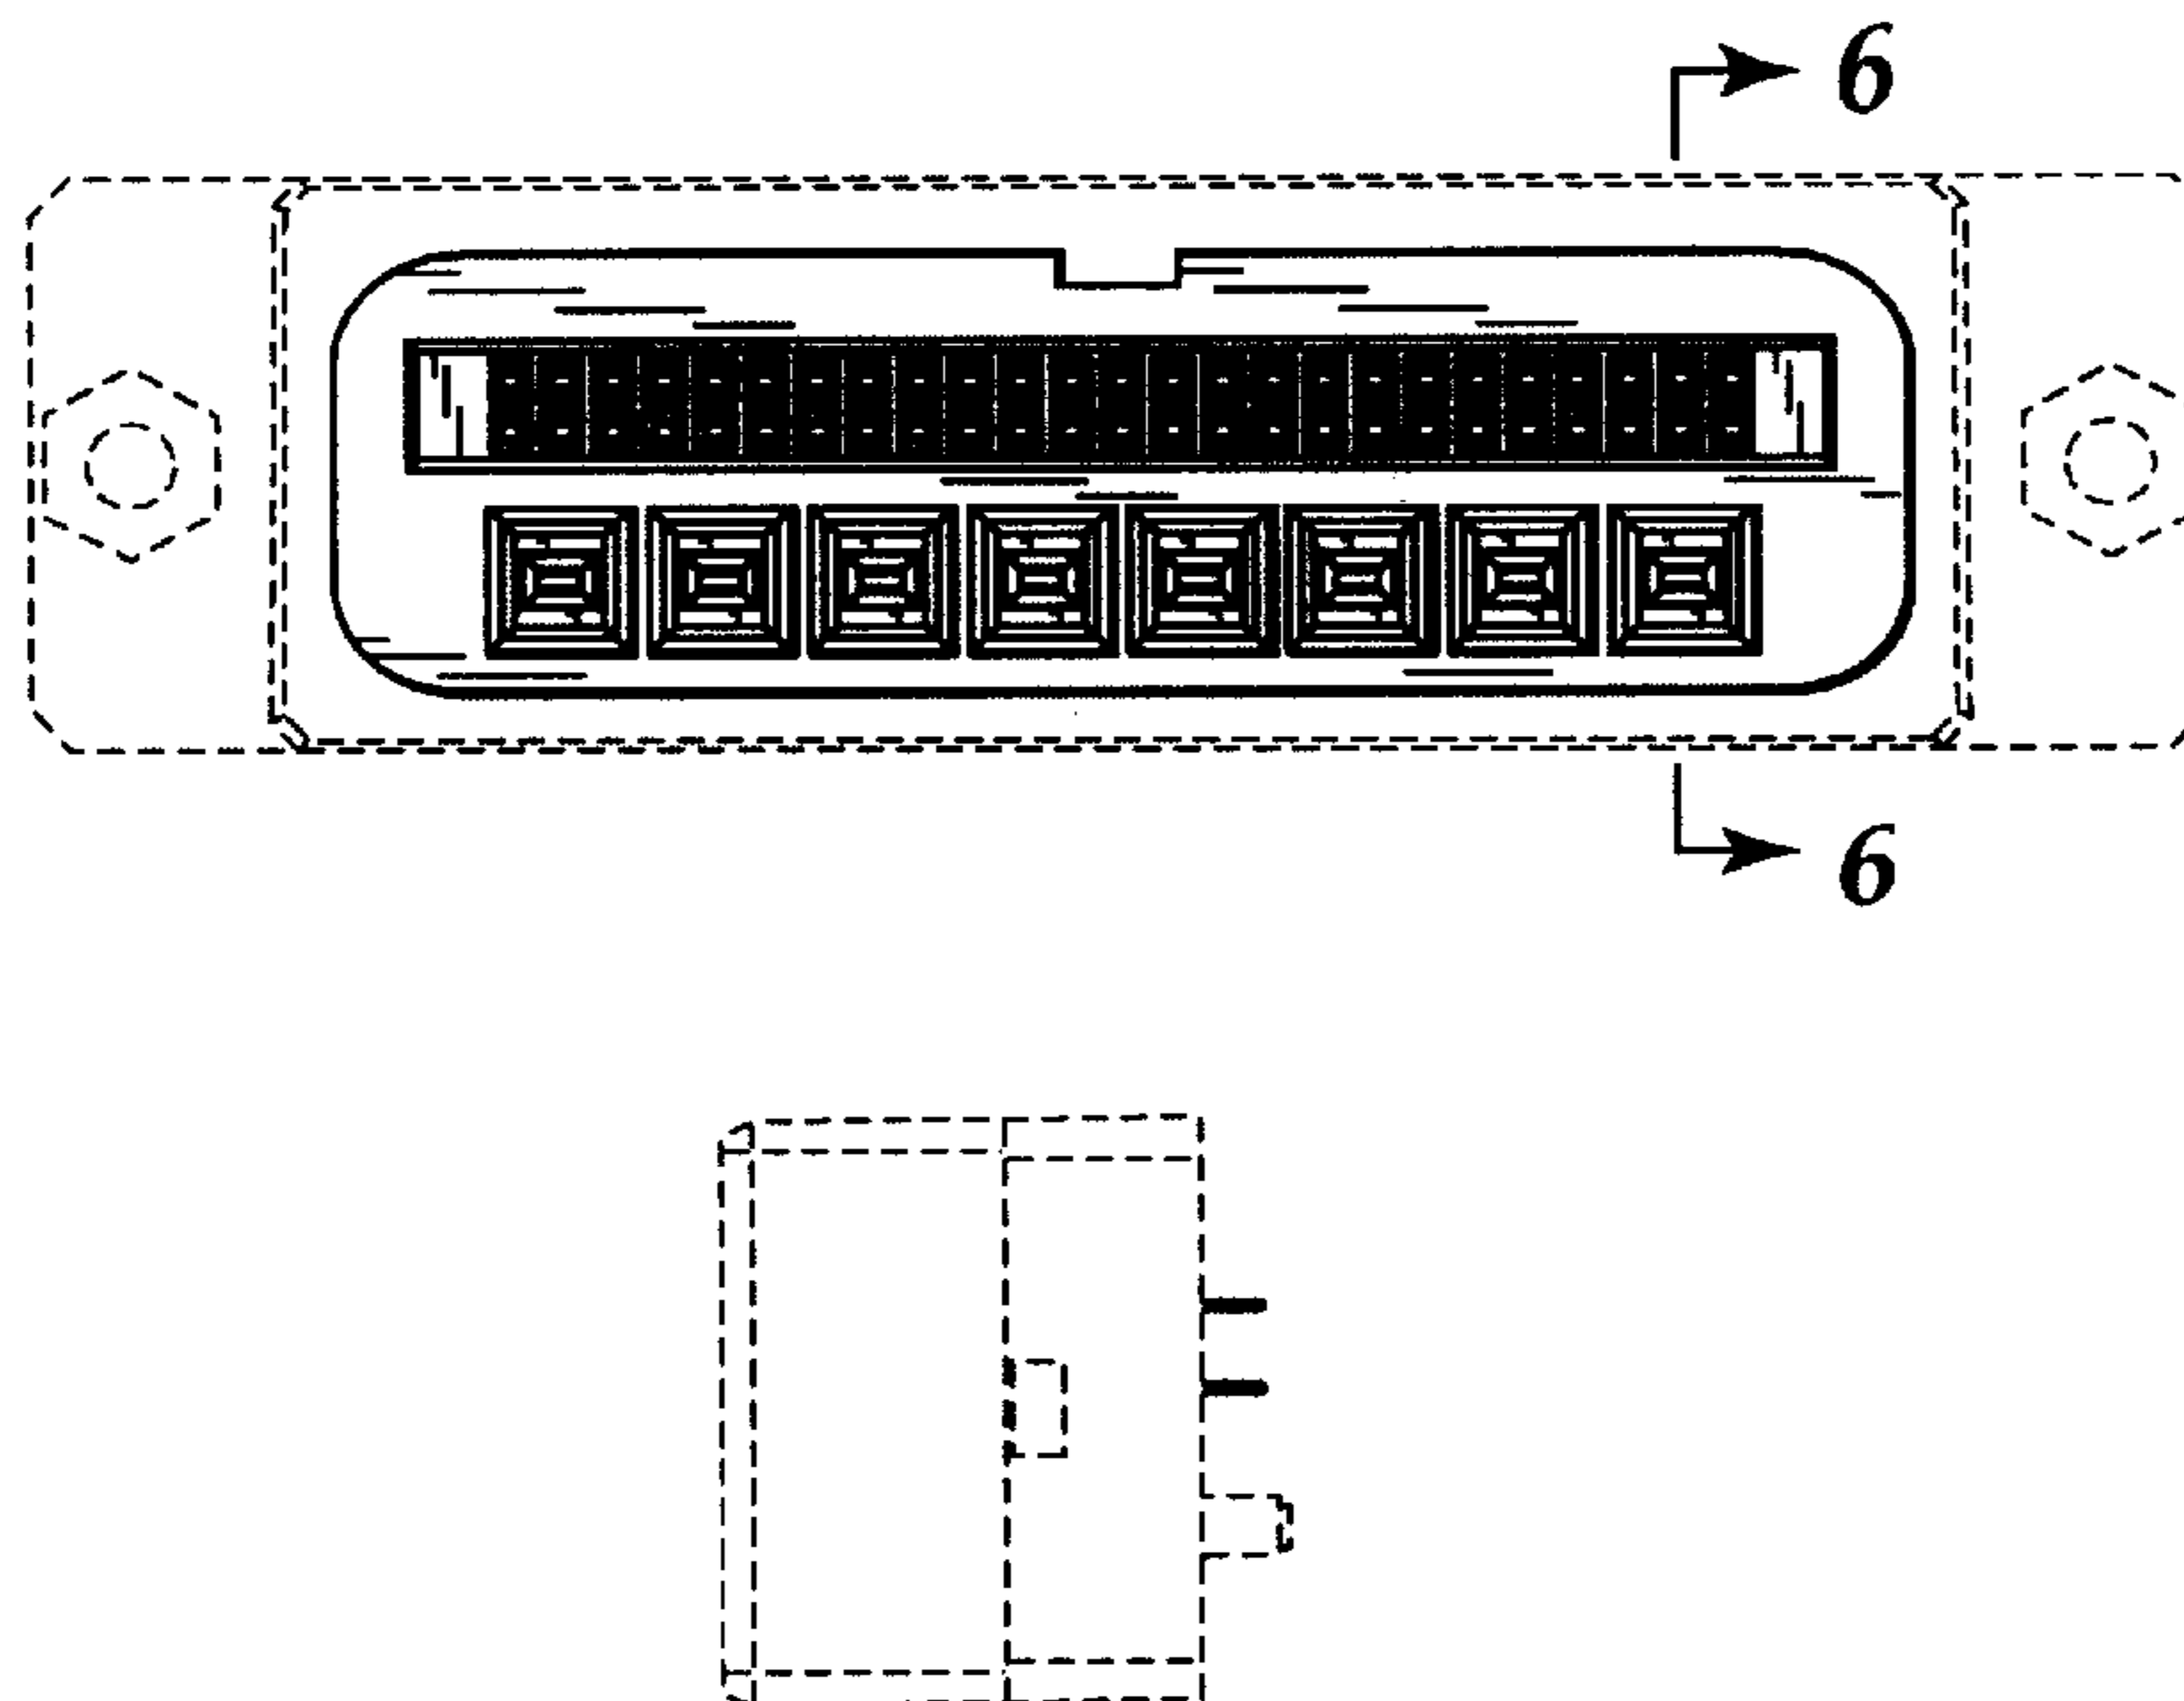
is a top side view of the board mount connector of FIG. 1.
